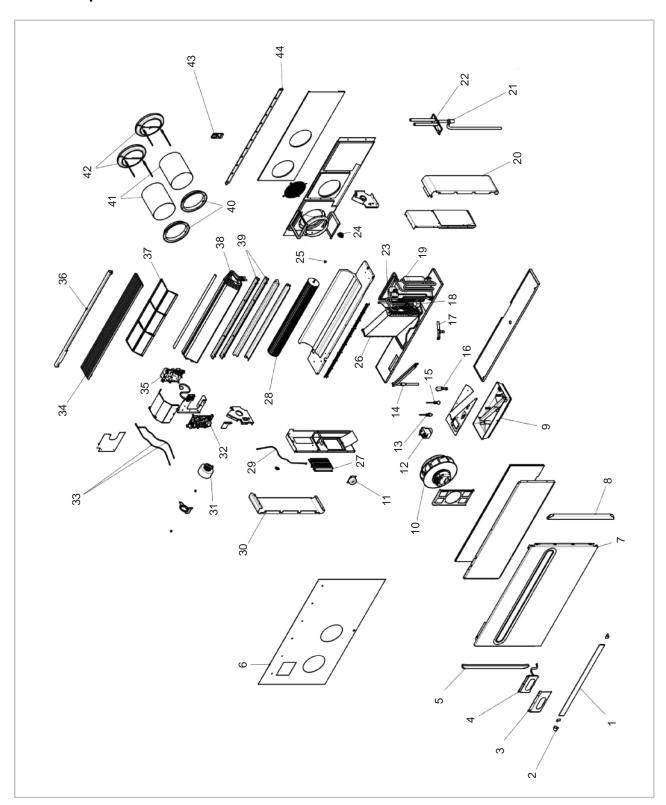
Exploded view of the unit - housing KWT 240 DC
